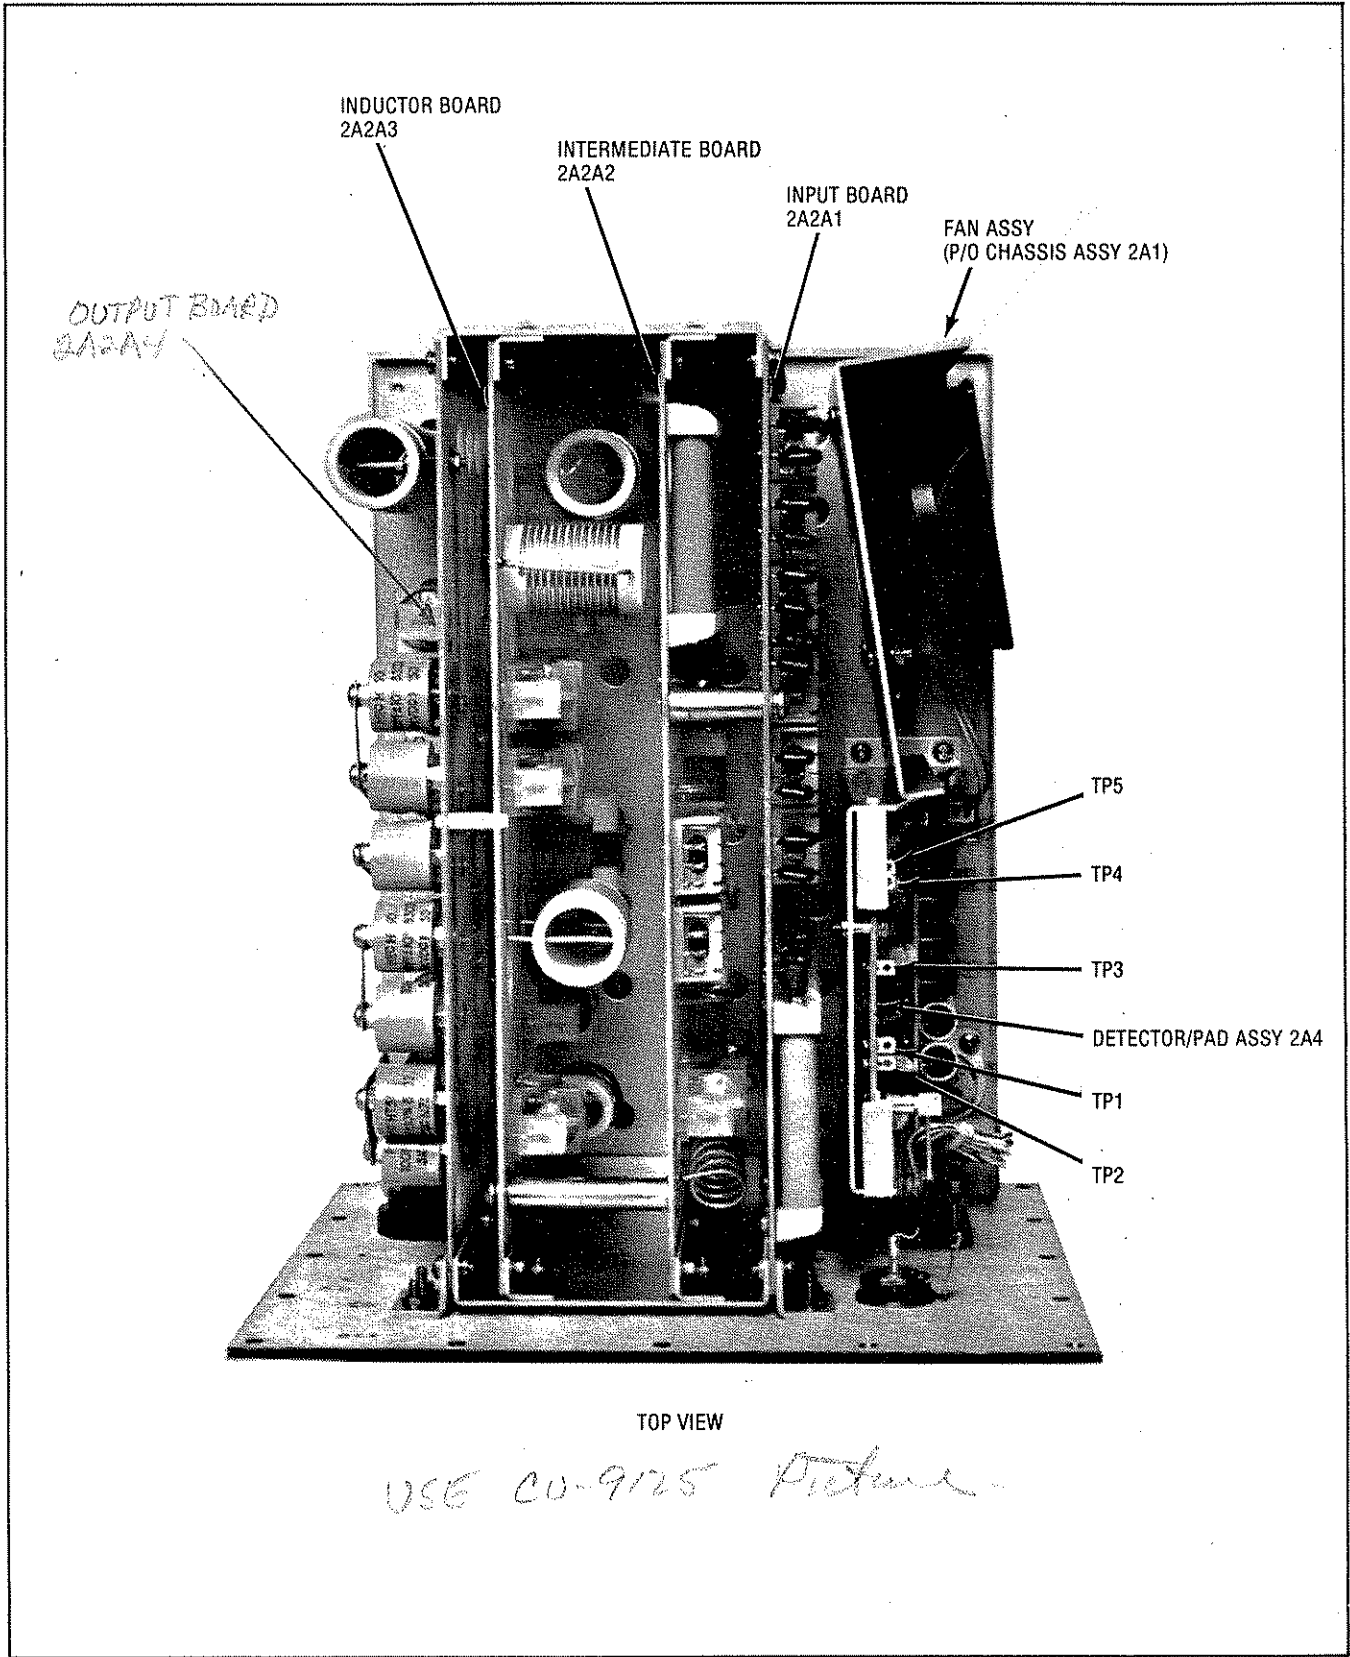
Major Assembly and Component Locations (Sheet 2 of 5)
